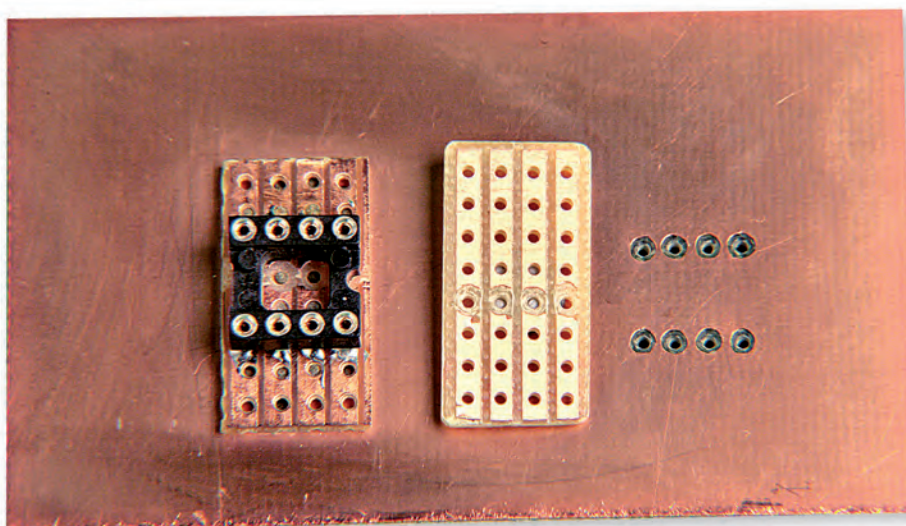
A method suggested by Mike 2E0LTJ was to make a 'daughter-board' using a small piece of Veroboard and stuck over a matching set of cleared holes on the main p.c.b. material baseboard.
